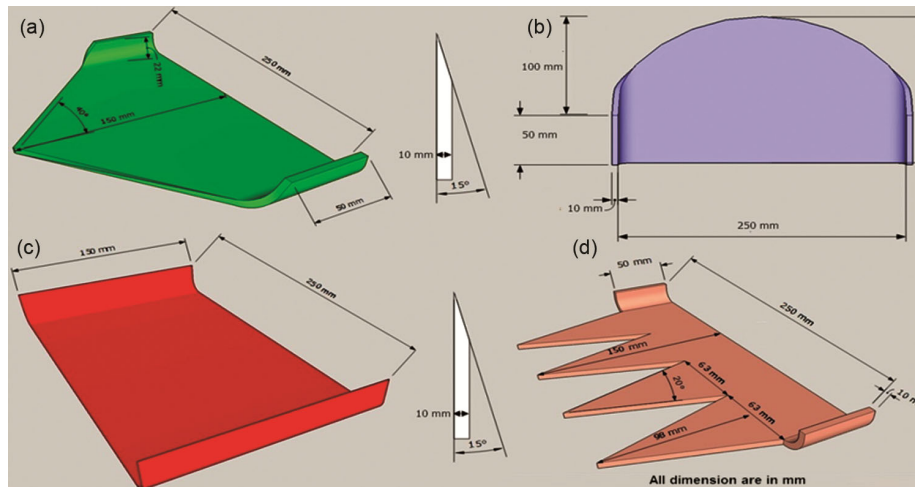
Schematic view of different shape of blade for turmeric and ginger harvesting (a) V shape, (b) convex, (c) rectangular and (d) triangular fork.
